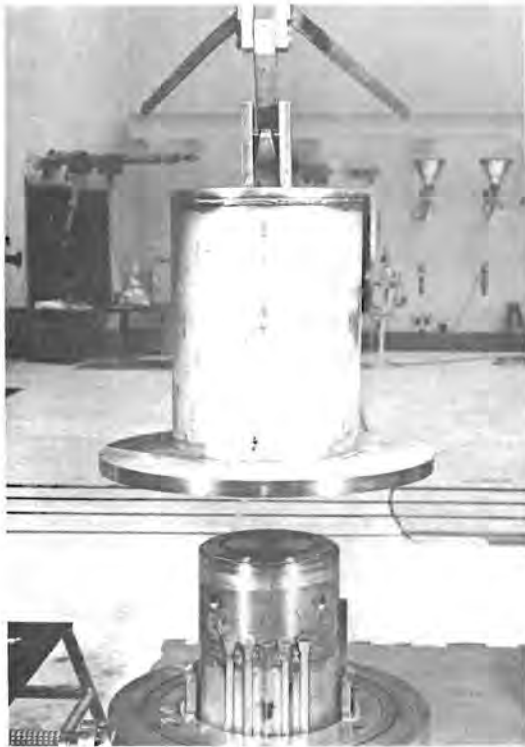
Vacuum Chamber Hood Being Installed in Preparation for Canister Leak Check
